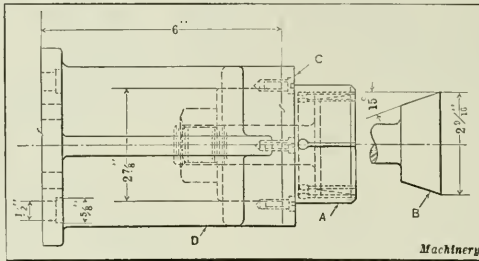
Draw-in Expanding Fixture for chucking the Fan when squaring the Hub Face
